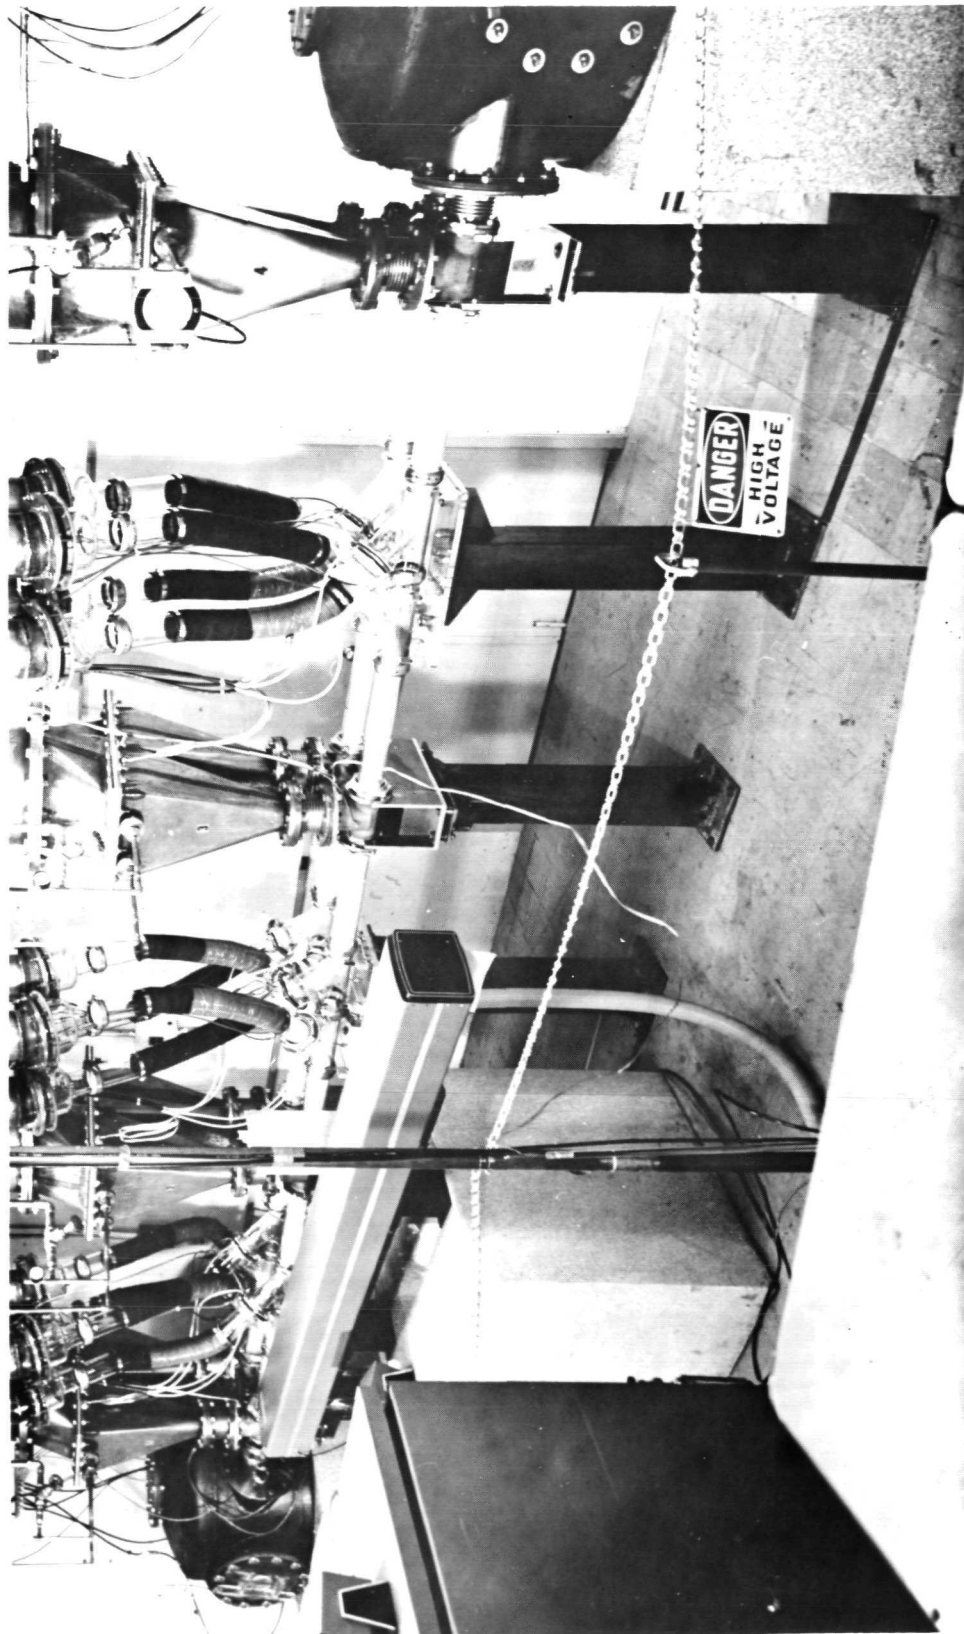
INERT GAS SHIELD WELD FIXTURE
